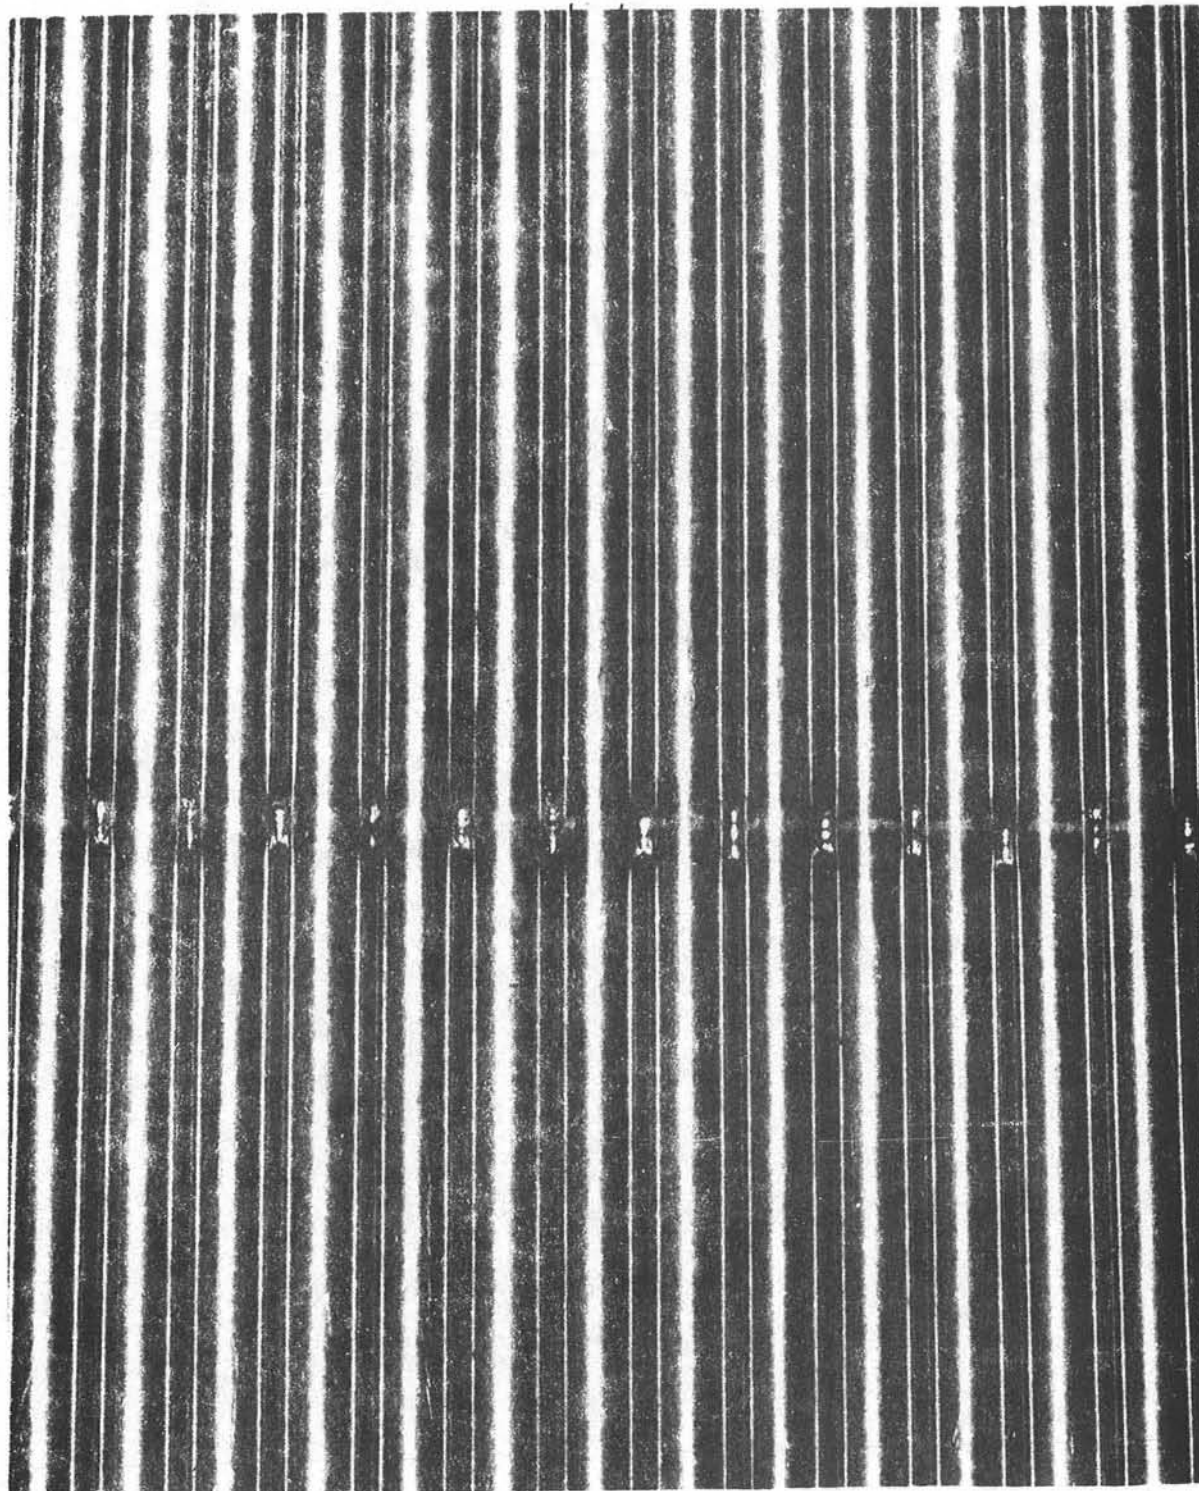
Close-up of Welded Receiver Tubes
